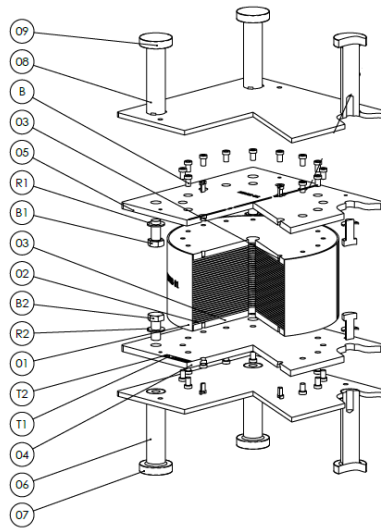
3D exploded view of ISOSISM[®] HDRB-H 550x155.
